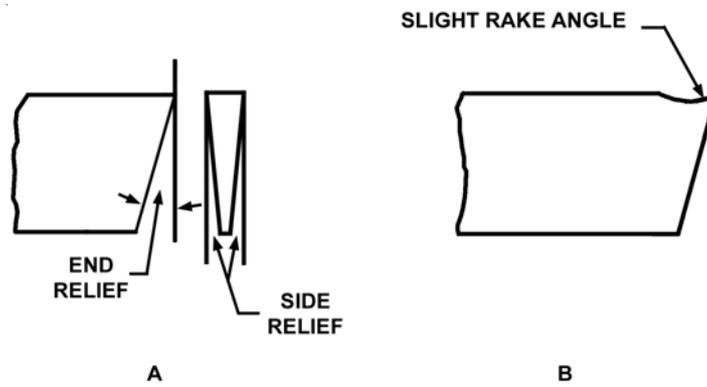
, (A) Side-relief angle on parting tool blade prevents binding. (B) Slight back-rake aids the cutting action.
